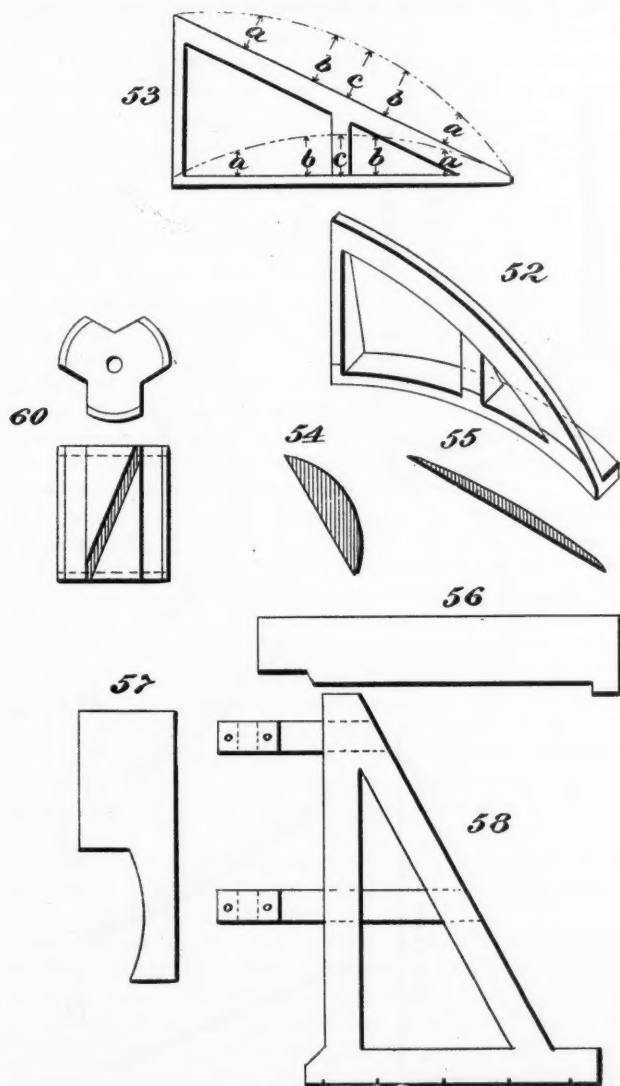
to 58 inclusive show the preparations necessary to be made by the pattern maker when the mold of a large screw propeller is intended to be swept up in loam.
